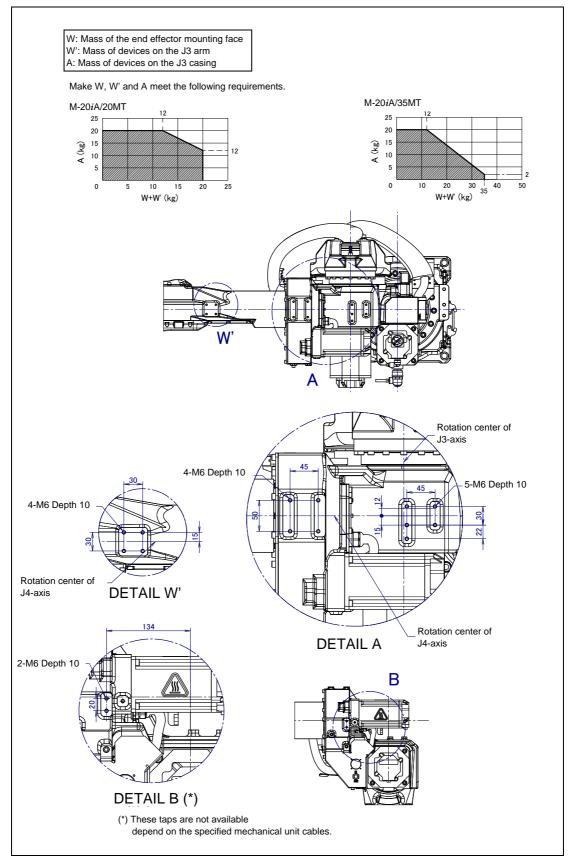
(b) Equipment mounting faces and load limitation (M-20iA/20MT/35MT)
